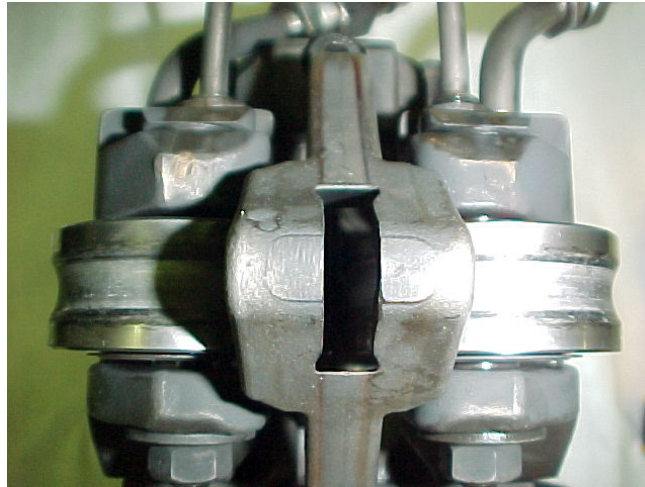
RE-20 USX-2 Guide Assembly after 4000+ tons rolled over 90m/s
